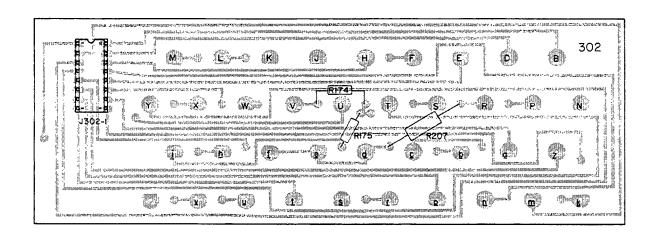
P.C. BOARD ASSEMBLY, BOARD 302, DRAWING
